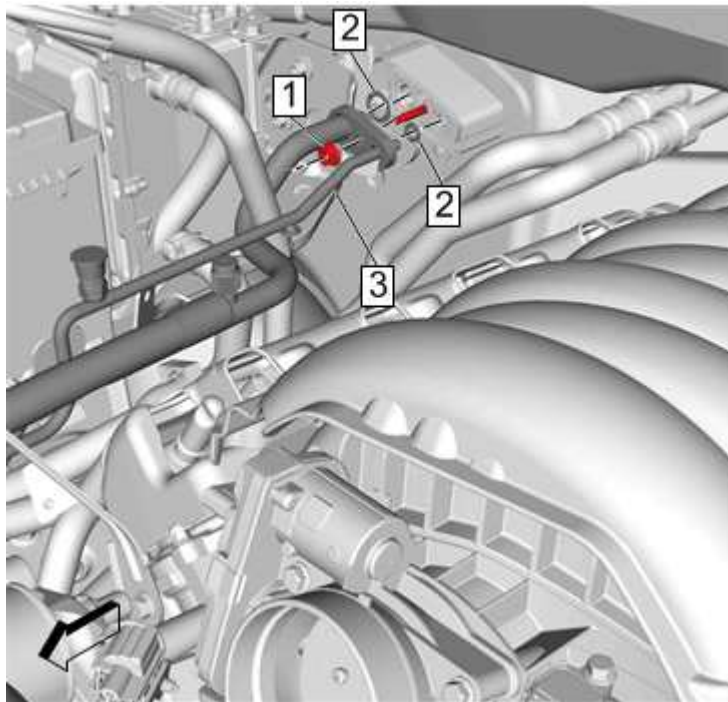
Air Conditioning Evaporator Tube And Air Conditioning Condenser
